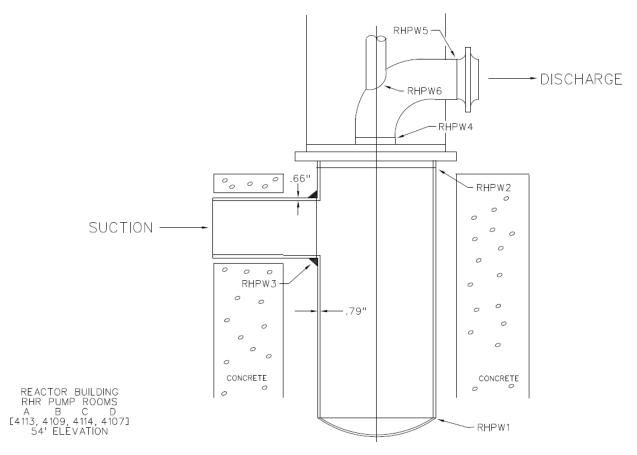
Weld 1-DP-202-RHP-W3 (Extracted from Reference DWG B-3)
